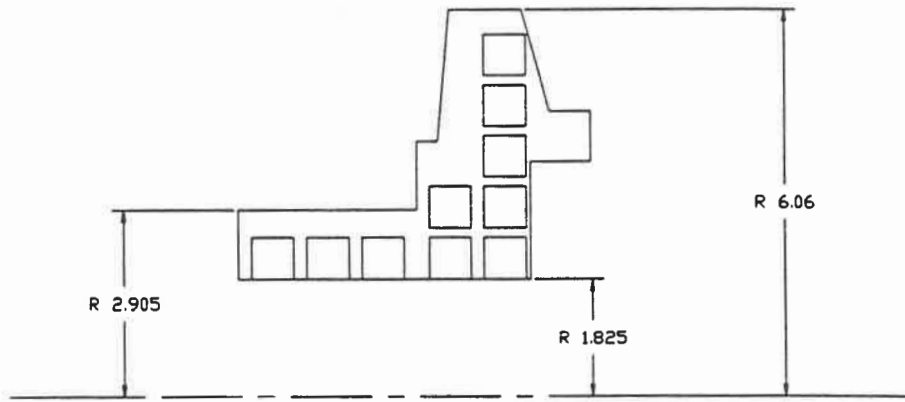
The locations of specimen blanks in the PWC engine compressor disc forgings.
